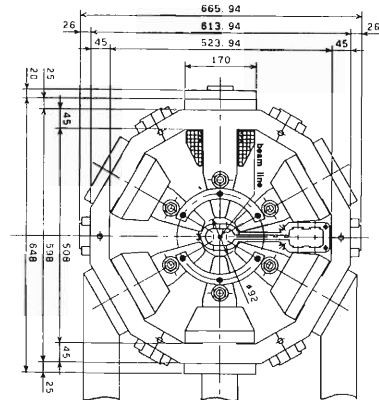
Cross-sectional view of a newly designed sextupole magnet.
